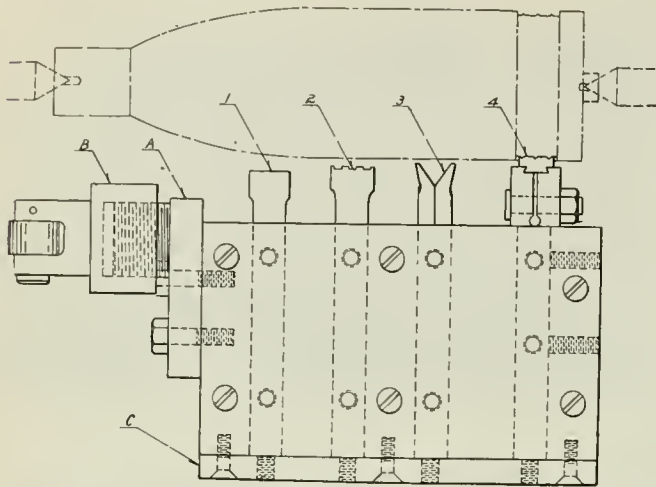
TOOL ARRANGEMENT FOR GROOVE AND WAVE.
